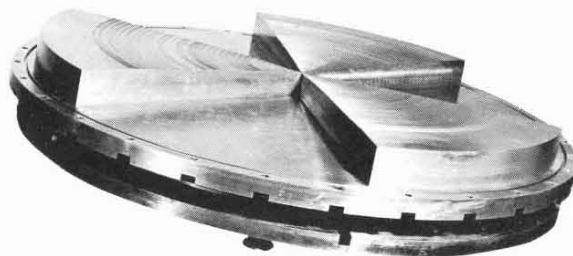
Inner sectors mounted on circular iron plate which doubles as part of the vacuum tank wall. Pole-tip countouring shown is not yet final.
